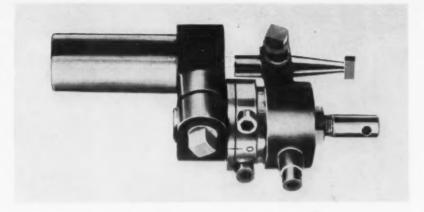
R and L adjustable recessing tool of improved design that is easier to adjust and more convenient to use
